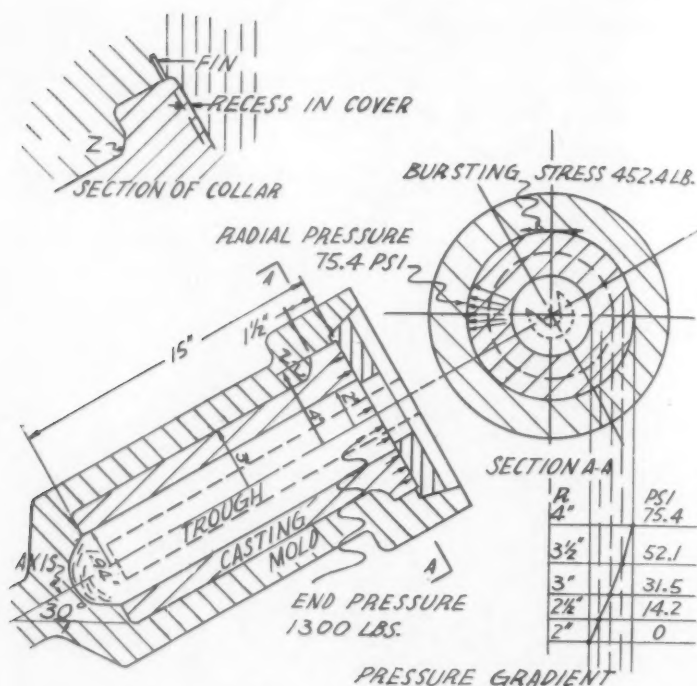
DESIGN OF MOLD FOR STEEL CASTING.
